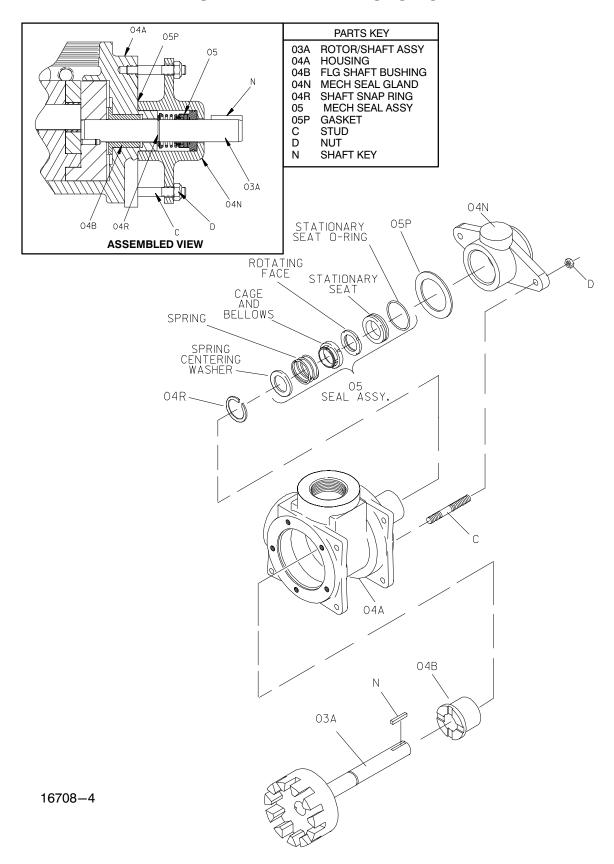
Standard Friction Drive And Optional 60A And 61J Mechanical Seals
